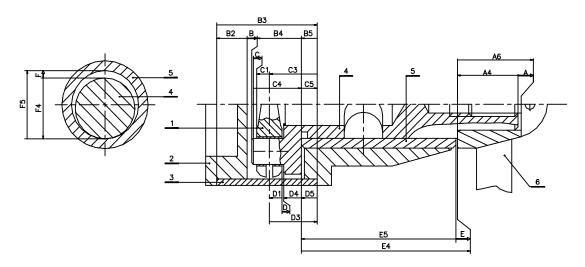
An example of an *implicit* interrelated tolerance dimension chains. The tolerance chains associated to the design functions C and D involve the same component dimension C3 and D3. This is also true with C5, B5, and D5.
